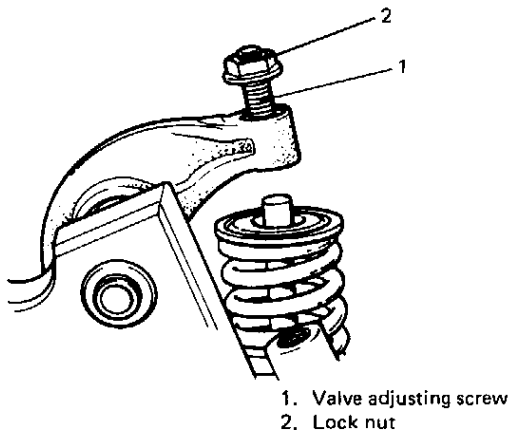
Valve Adjusting Screw and Lock Nut
